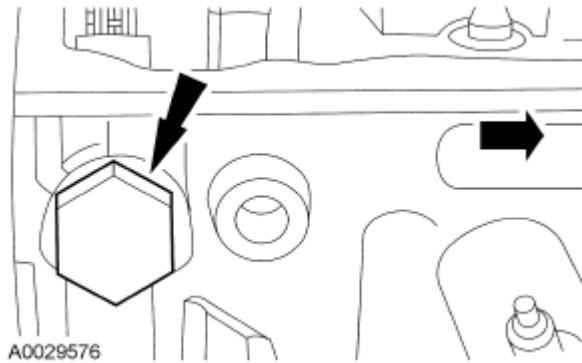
Identifying RH Hydraulic Camshaft Tensioner
